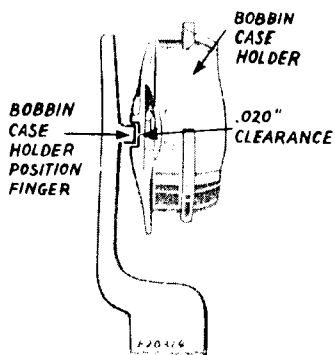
Showing Thread Clearance Between Bobbin Case Holder Position Finger and Bobbin Case Holder
